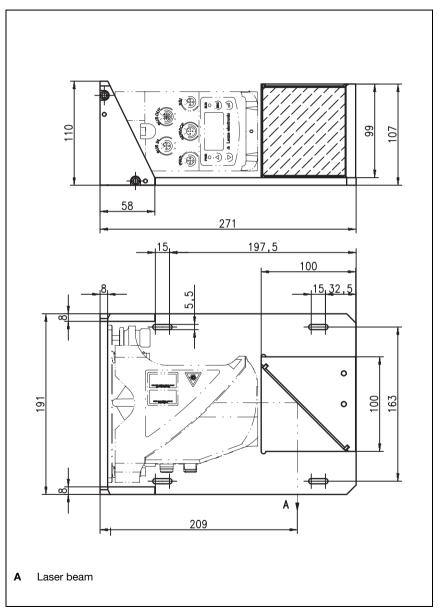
Dimensioned drawing of US AMS 01 deflector unit
